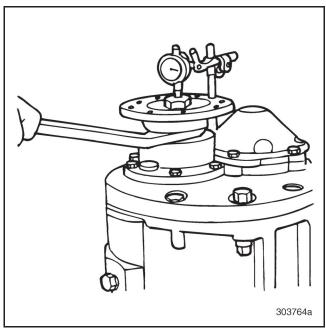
Measuring Front-Driving Shaft Bearing End Play
